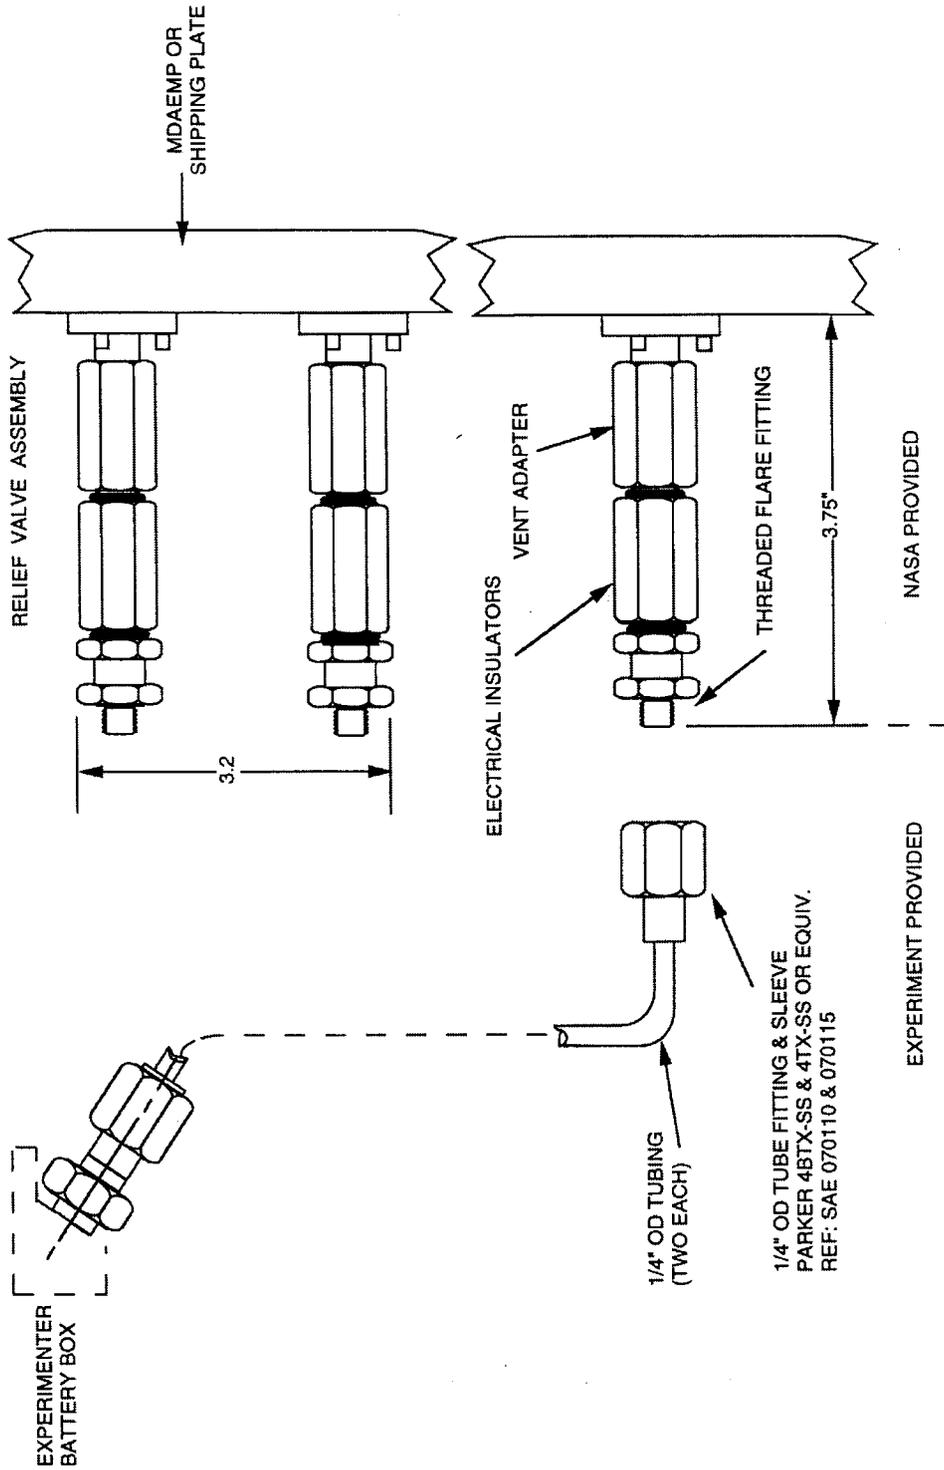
HITCHHIKER MOTORIZED DOOR CANISTER – BATTERY VENT ASSEMBLY
